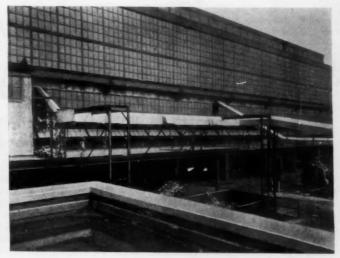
Discharging End of Scrap Conveyor Outside the Building
